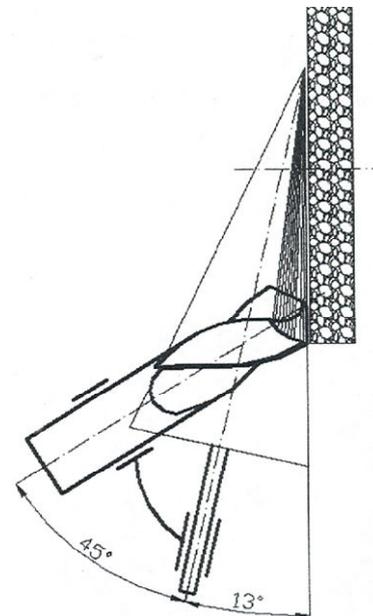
The sharpening of the cutting edge of the twist drill bit according to conical flank surfaces.
